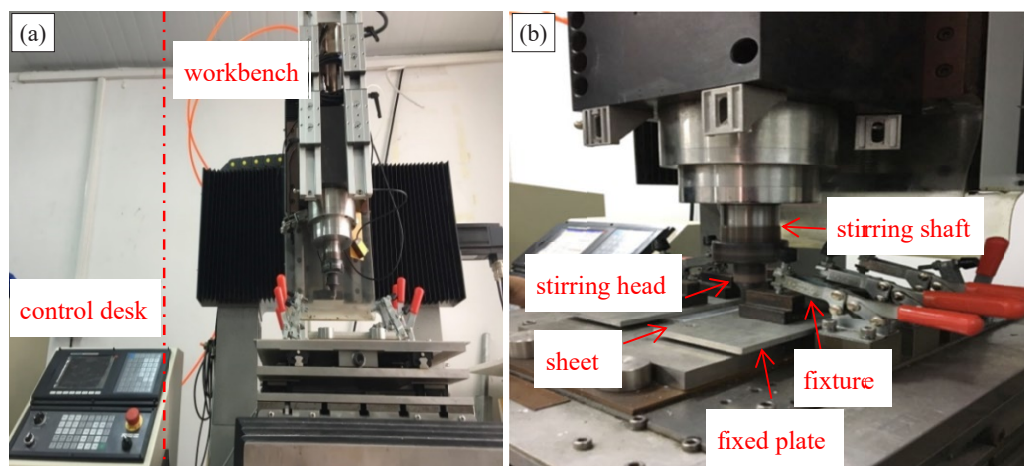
Friction Stir Welding equipment. (a) New high-speed friction stir welding equipment; (b) Equipment workbench and its specific parts
